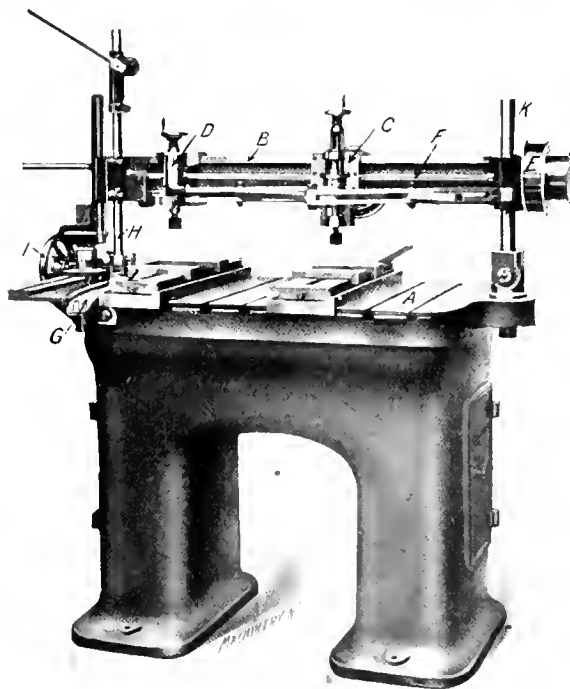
Thomas Auty & Co.'s 42-inch Patent Die-sinking Machine.
